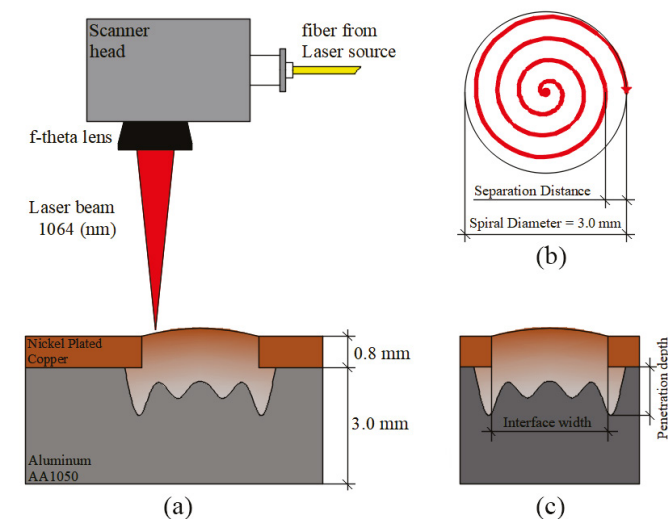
(a) Laser Welding configuration, (b) Welding path details, (c) weld seam characteristics.
